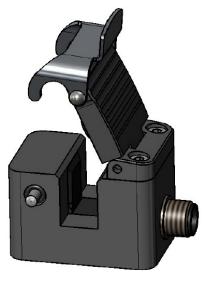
Drawing of sensor model L. Note: The drawings do not conform to real dimensions.
